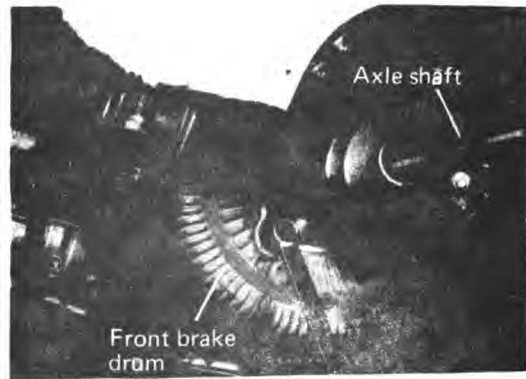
Disconnecting axle shaft (on the D. O. J side)
